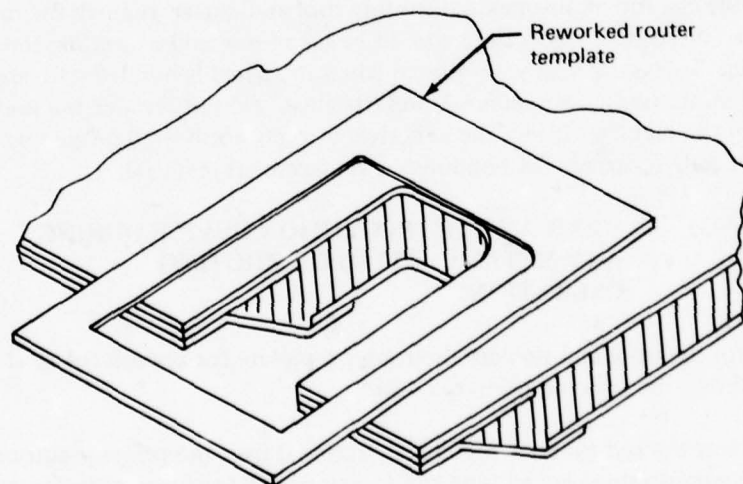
Secondary Router Cut to Remove Outer Skin
